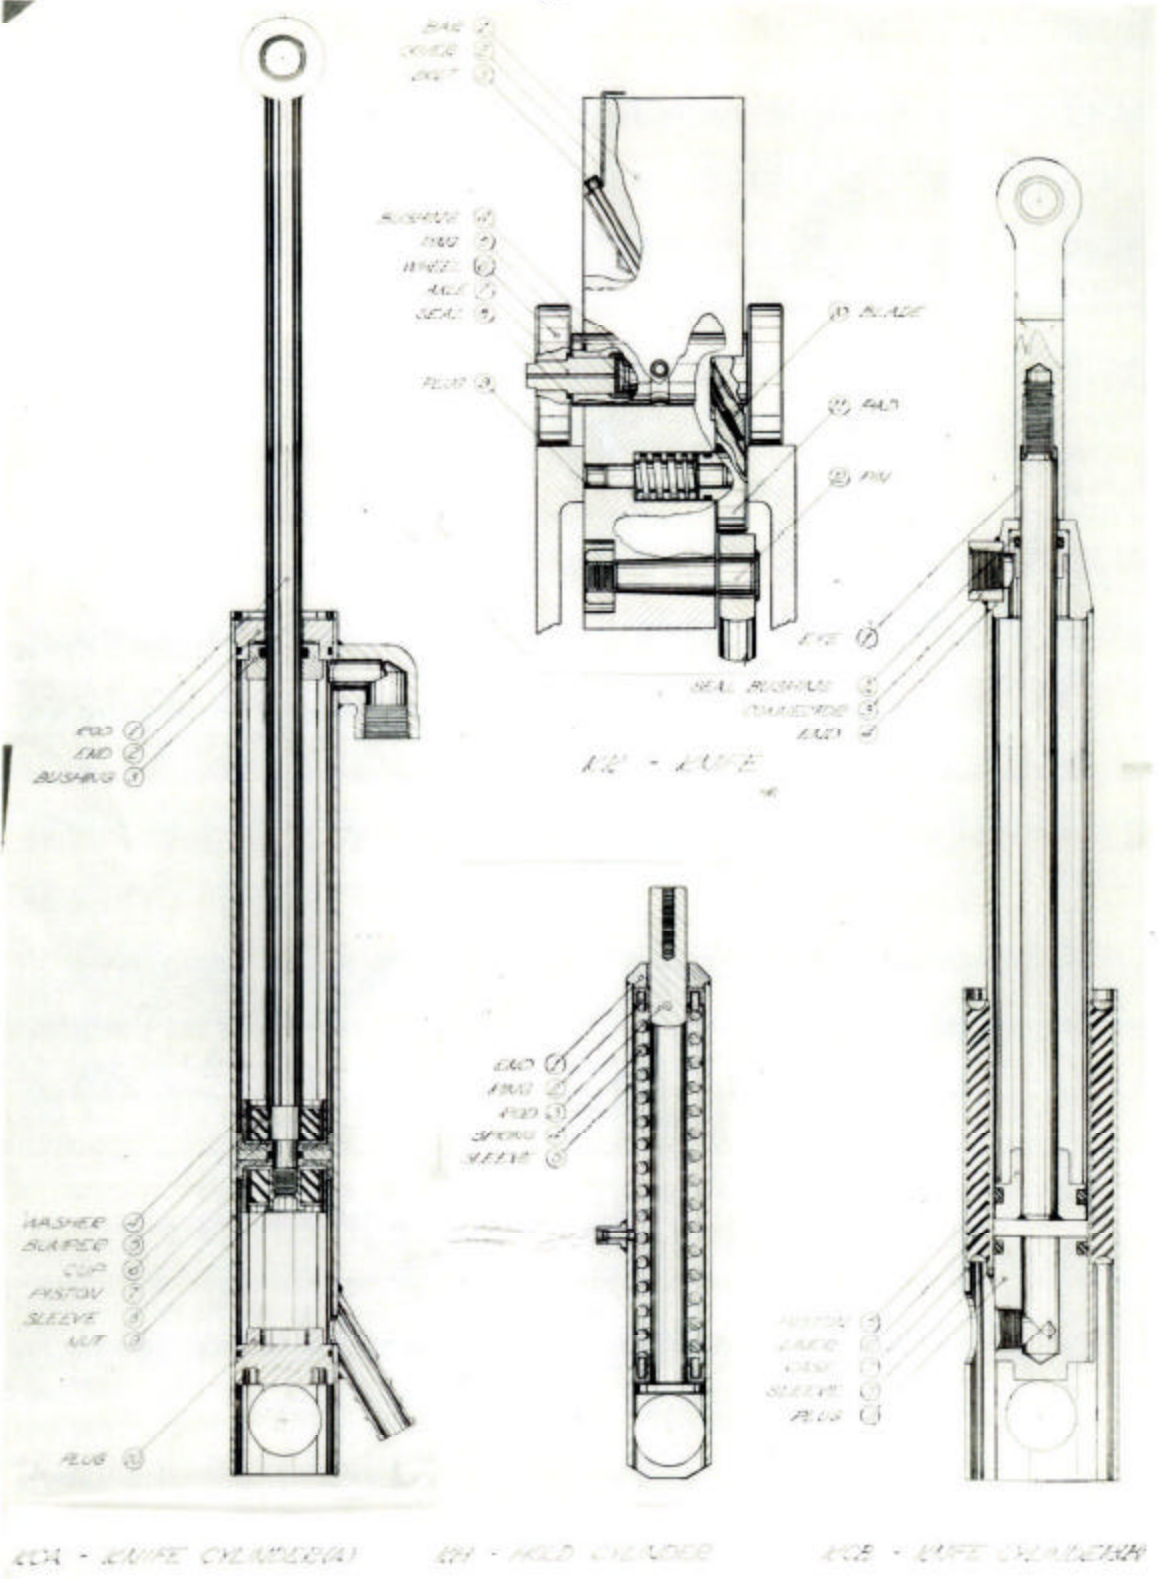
Knife Subassemblies - KK, KH, KCA, KCB
